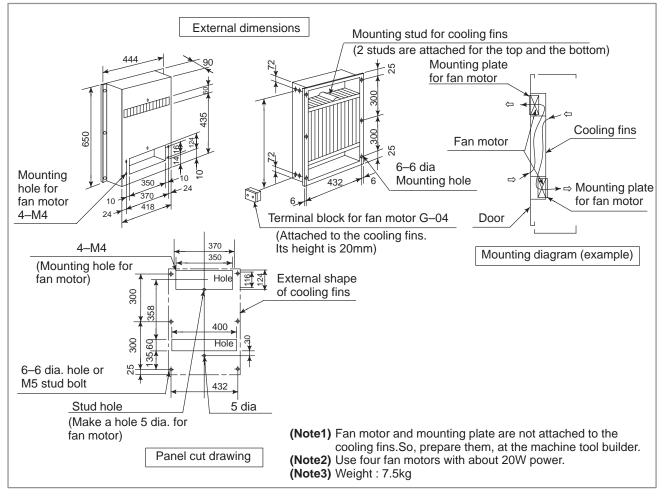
(c) External dimension and mounting method of cooling fin B (A02B–0053–K304)
